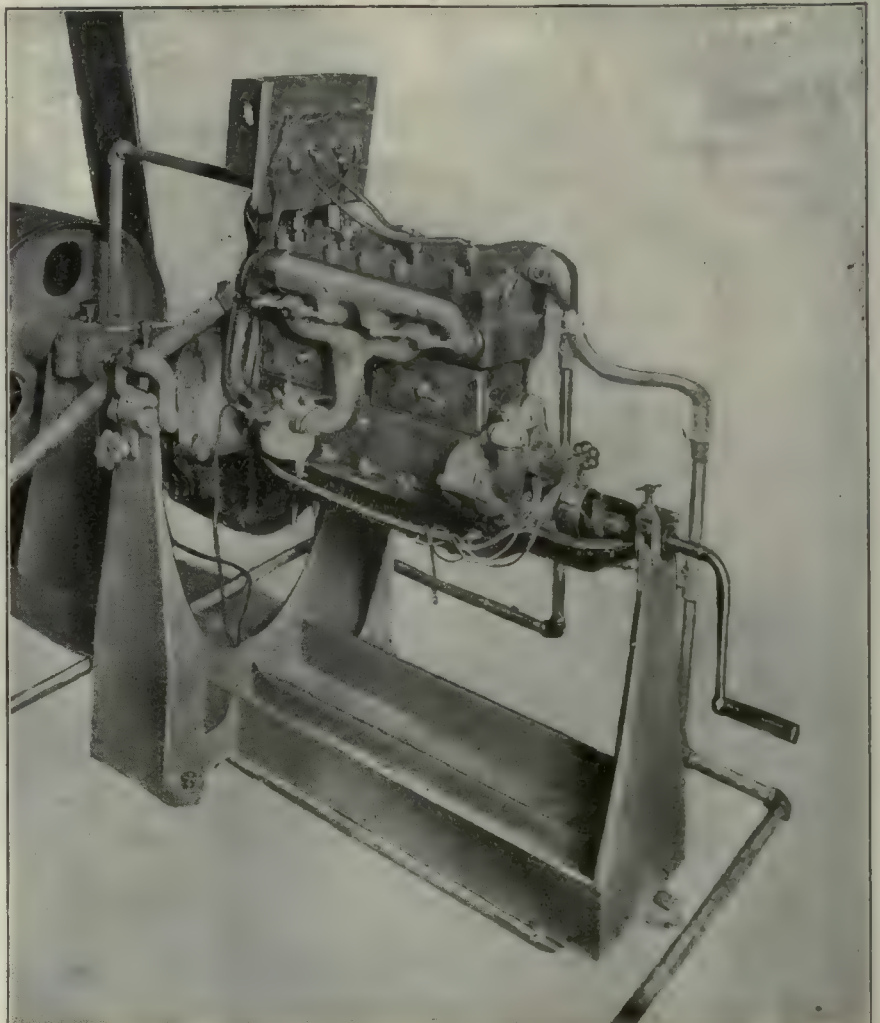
RUNNING-IN STAND FOR FINAL ASSEMBLY OF MOTOR UNIT
